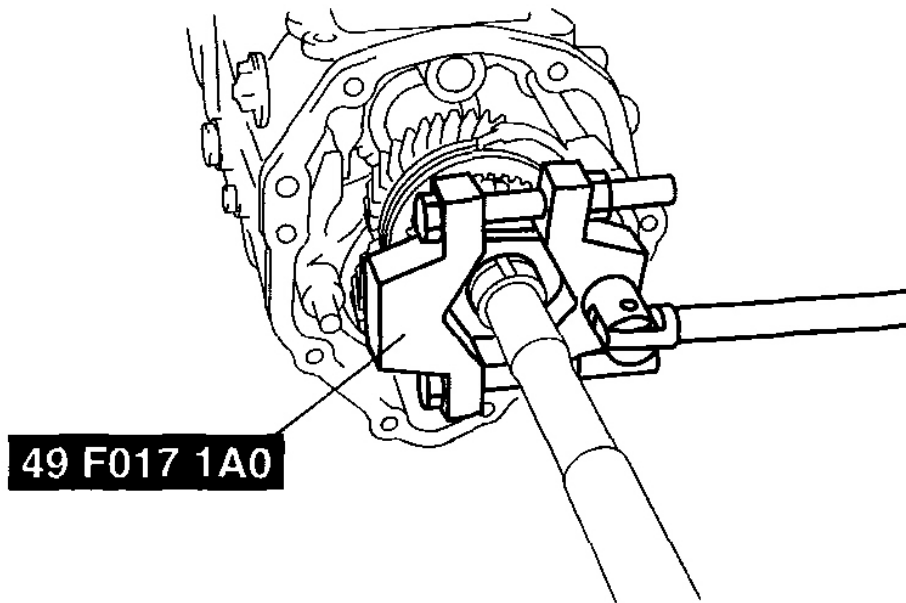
Sliding 5th/6th And 1st/2nd Clutch Hub Sleeves To Lock Transmission Into 5th And 2nd Gears
